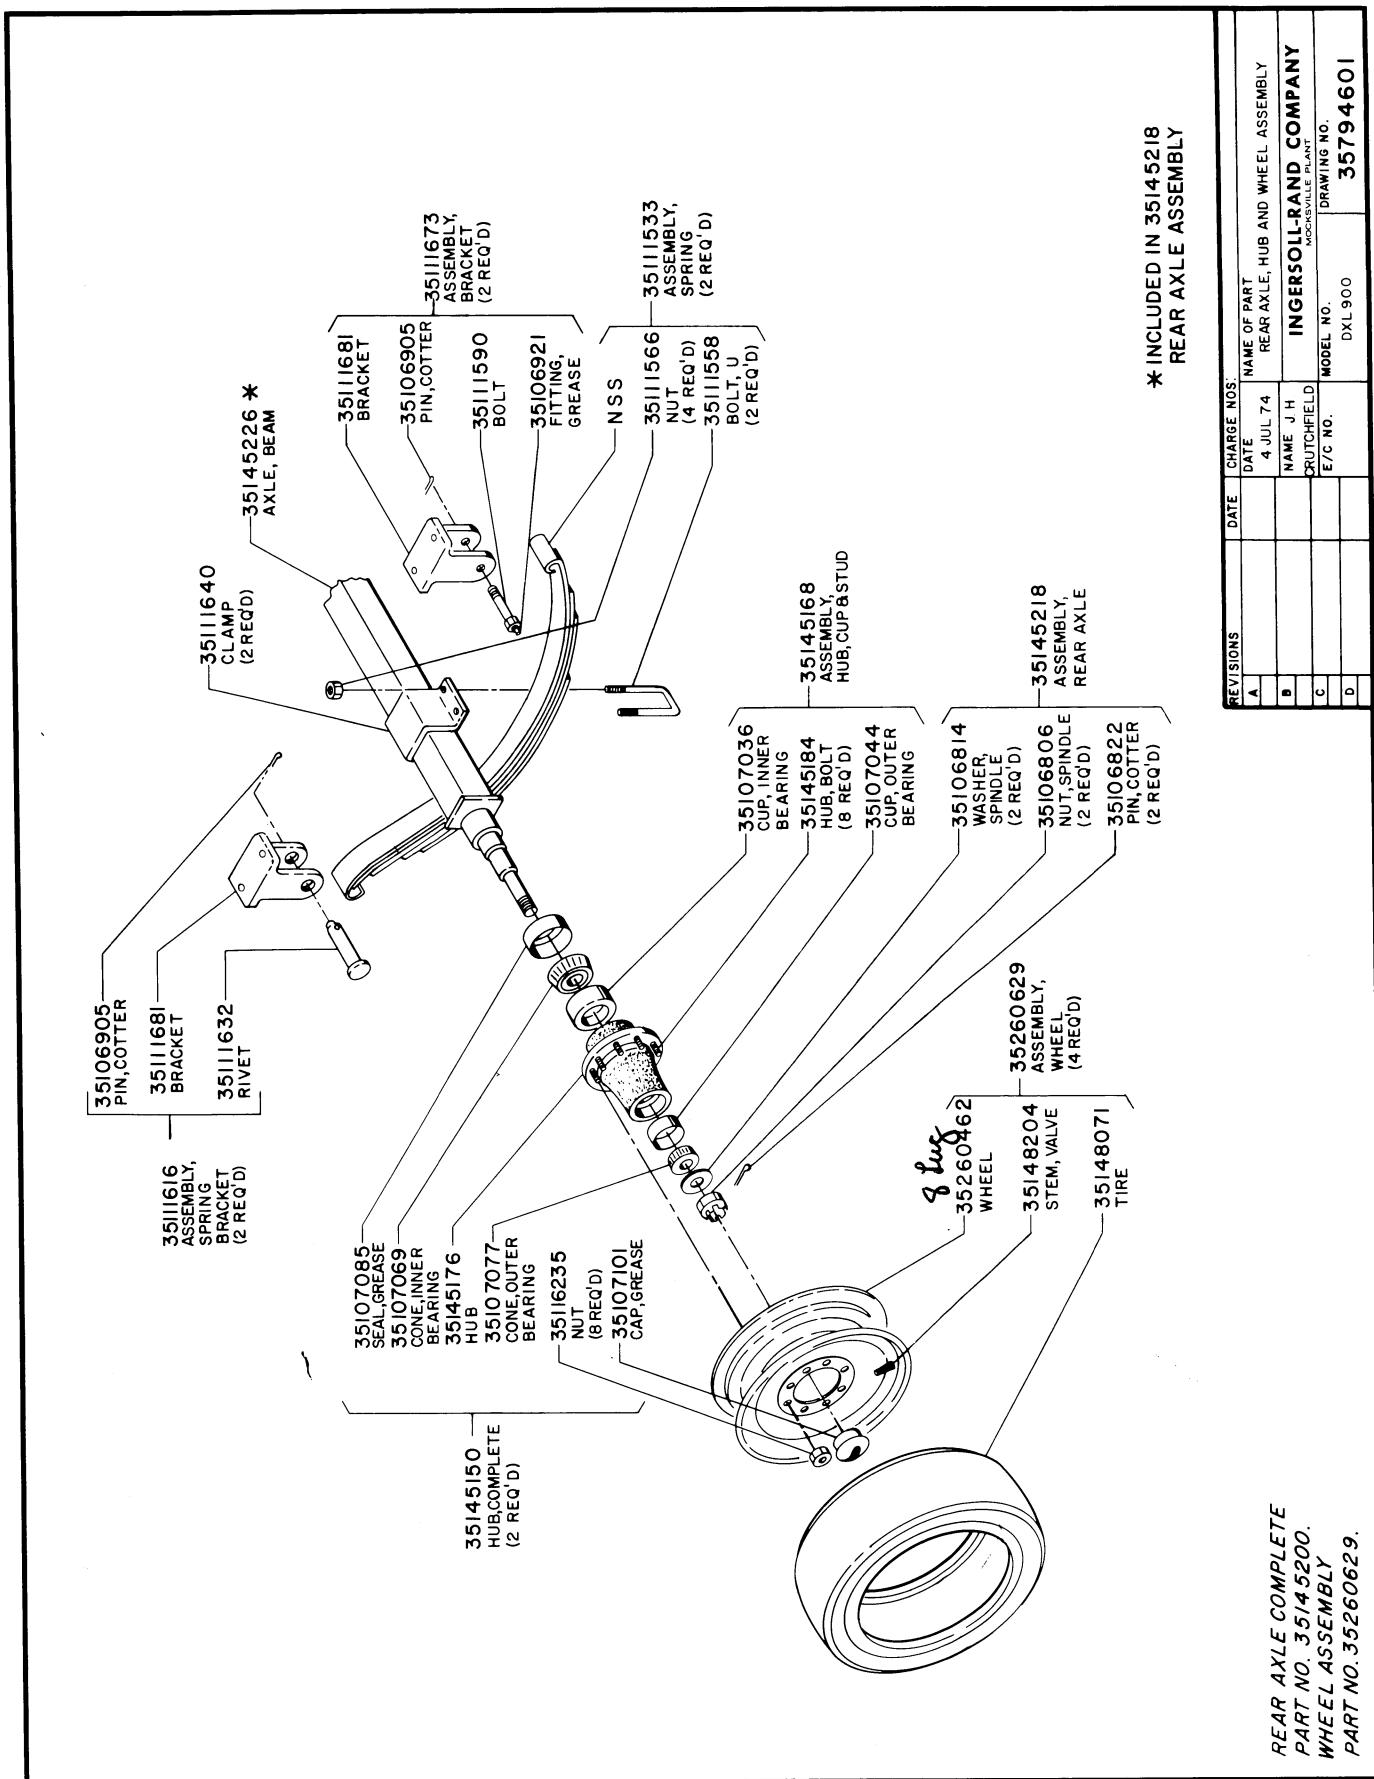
Rear Axle, Hub and Wheel Assembly
